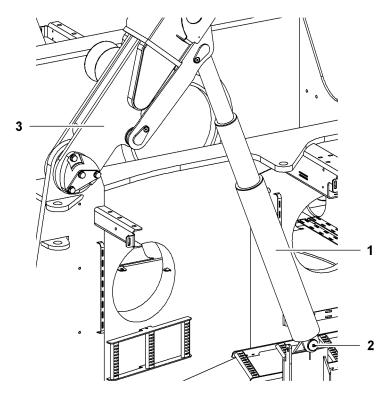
Lubricating the bearings on the A-frame cylinder
